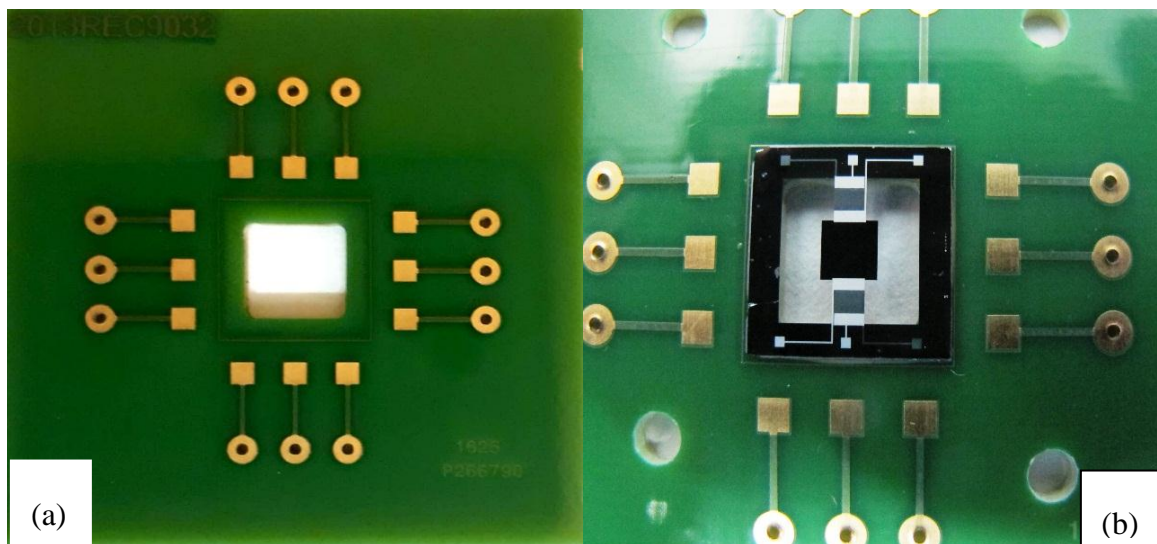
(a) Snapshot of PCB package. (b) Device mounted on a PCB package.
